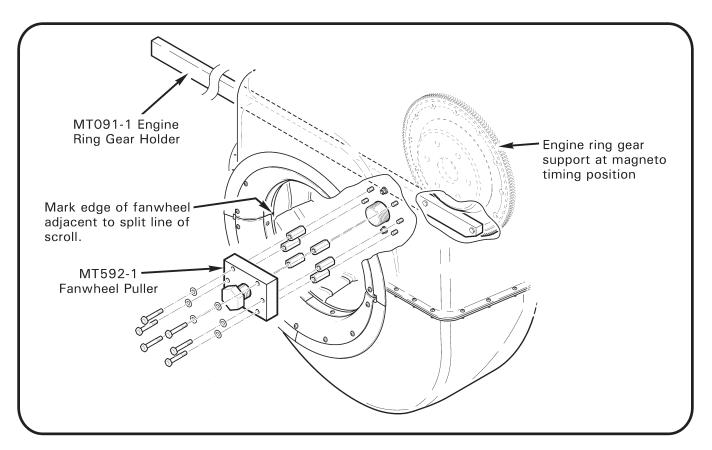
FANWHEEL PULLER INSTALLATION
